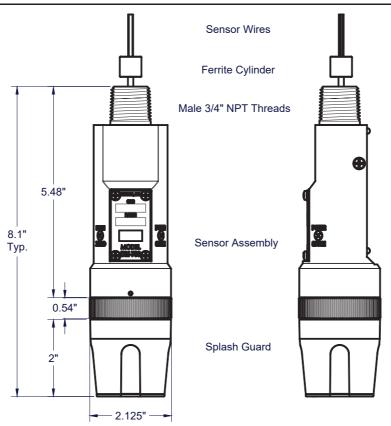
Outline and Mounting Dimensions (Sensor Assembly only)
